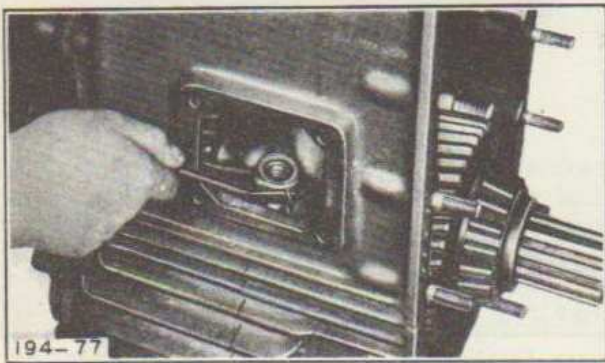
Removing Cotter Pin in Front Drive Declutch Shaft
